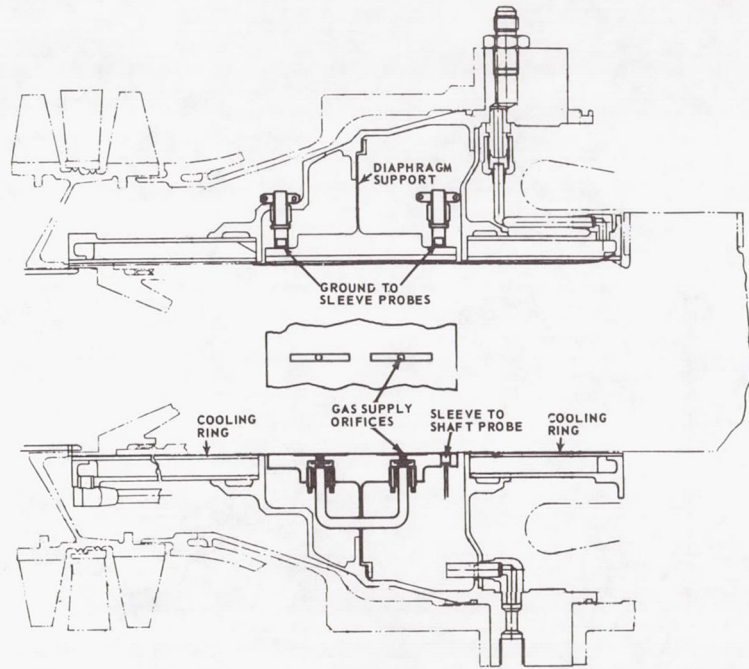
Turboalternator with Back-up Bearings (M-36878)
